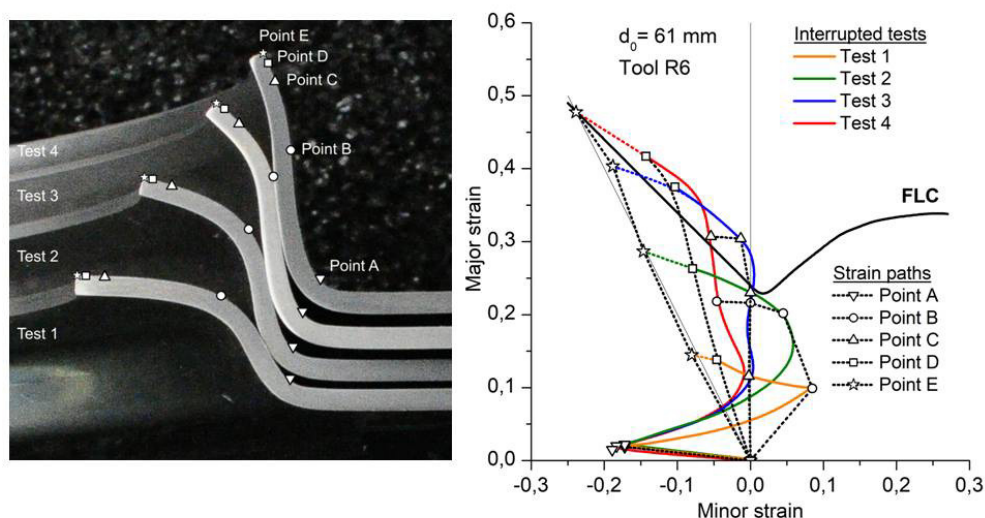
In-plane strain paths during the hole flanging process obtained from the interrupted tests using the pre cut 61 mm hole and a 6 mm punch edge radius
